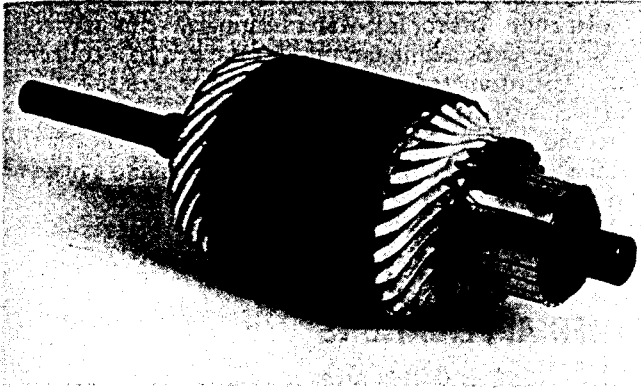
Starter Motor Armature With Wires Joined in Commutator Slots by Ultrasonic Welding
